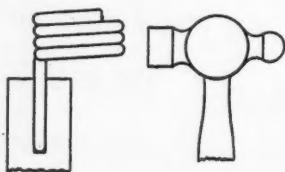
By Inserting the Loop into a Groove in the Block and Striking with a Hammer, the Loop is Twisted to a Central Position
